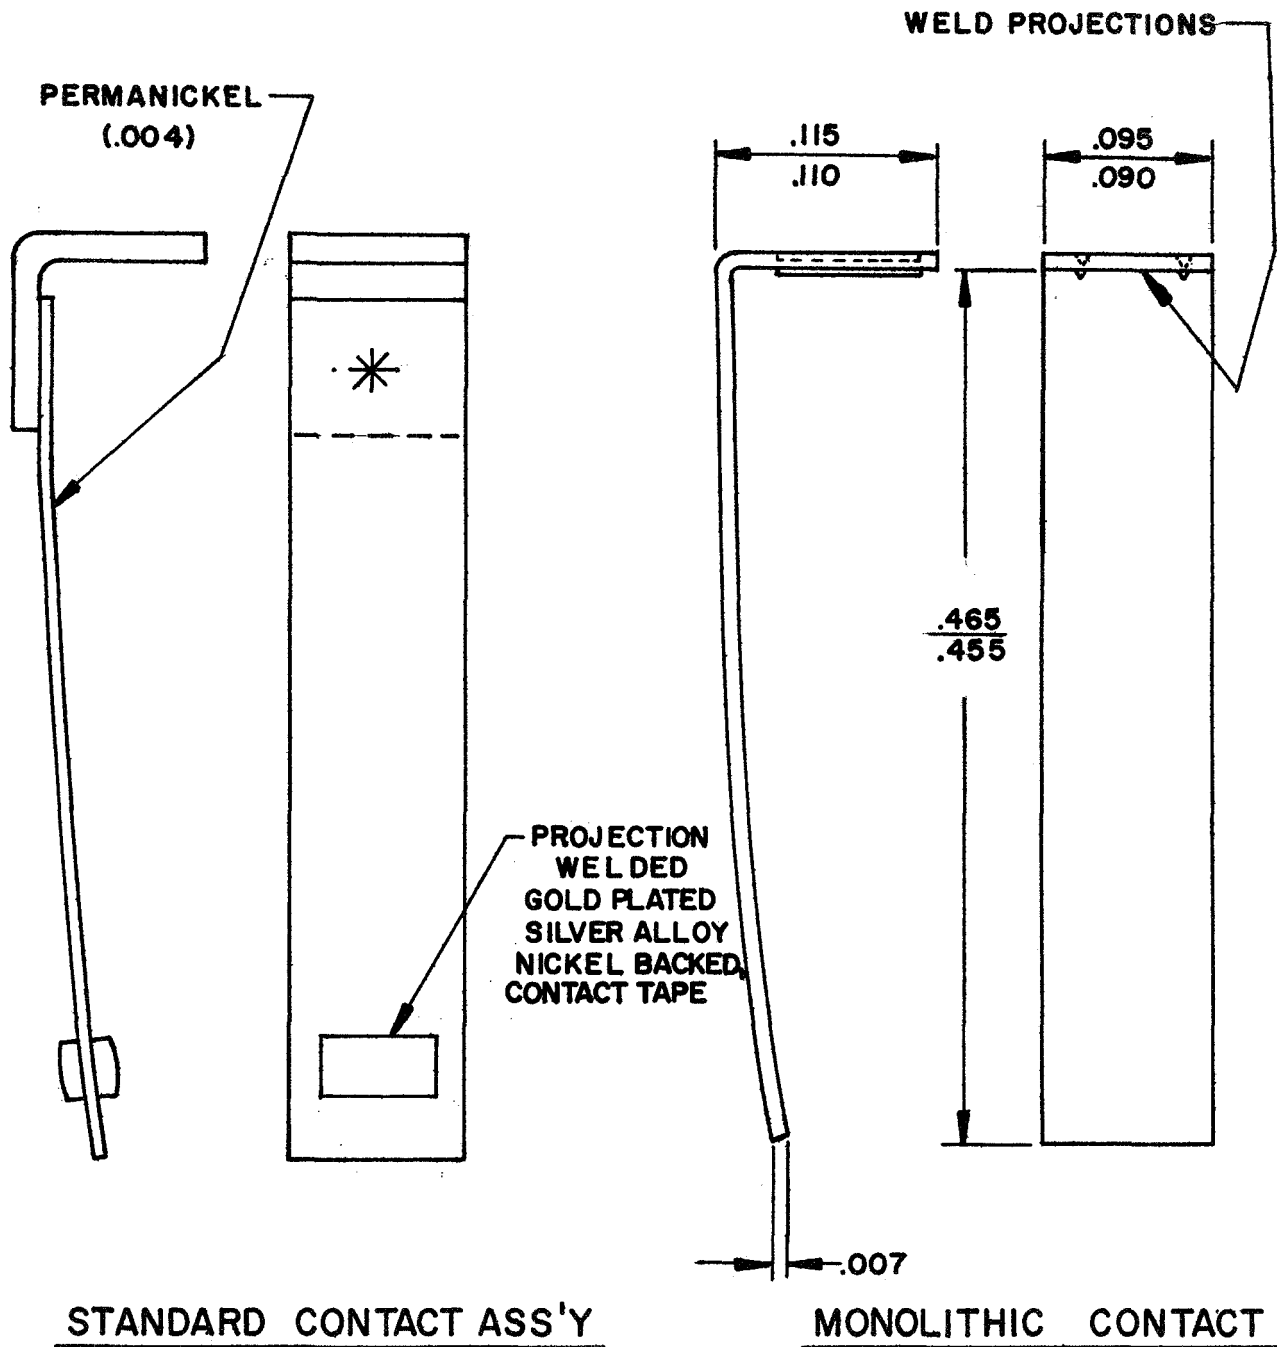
STANDARD AND MONOLITHIC MOVABLE CONTACT ASSEMBLIES.
